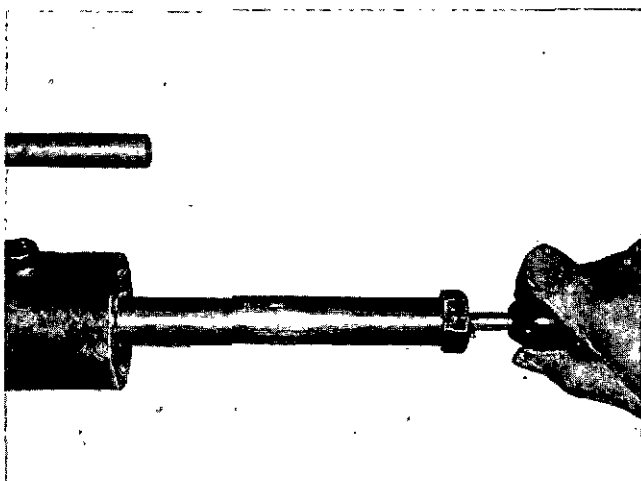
, V40189. Adjusting bore feed assembly
